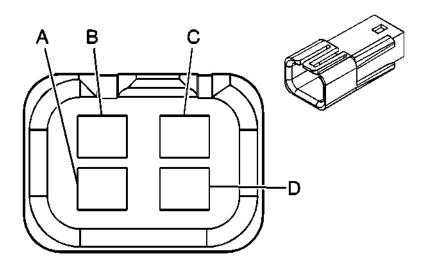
Outside Rearview Mirror - Driver C2 (DD0) Connector End View
